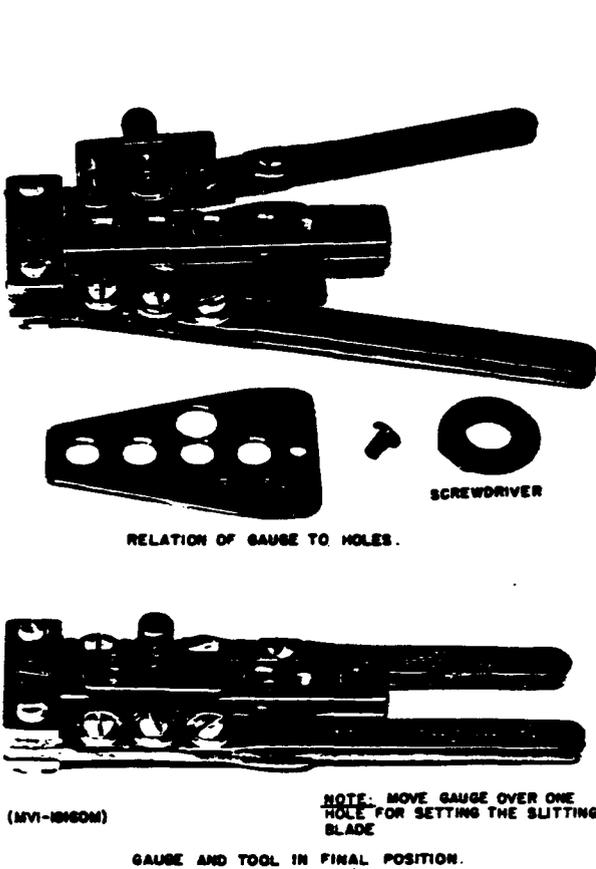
ADJUSTING BLADES ON COAXIAL CABLE STRIPPER (PARS. 4.21, 4.213, 4.511)
